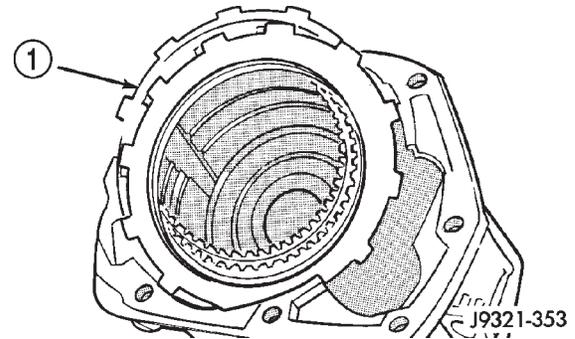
Removing Overdrive Clutch Pack Retaining Ring
